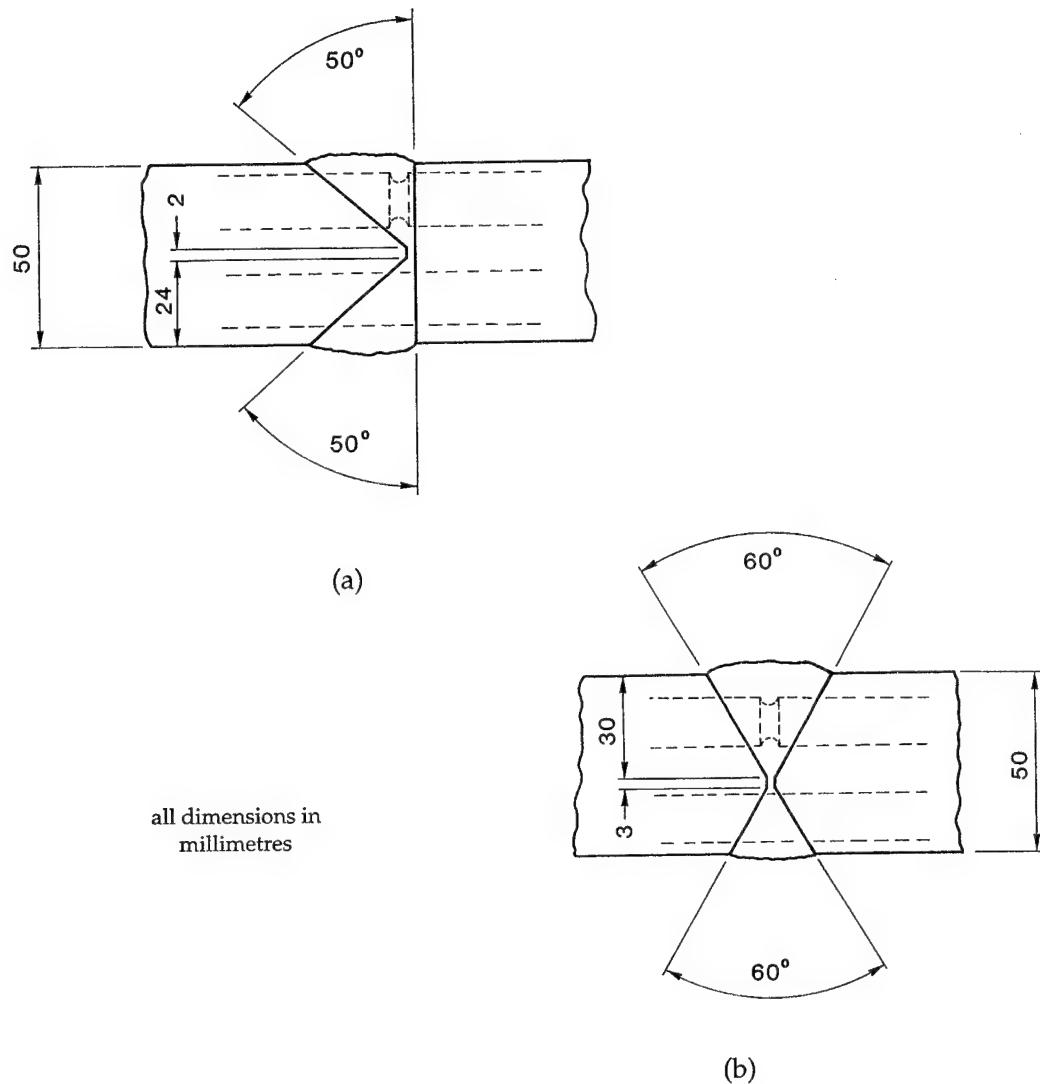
Weld preparation and specimen location with respect to the weld/plate orientation for (a) BIS 812 EMA and (b) QIN.
